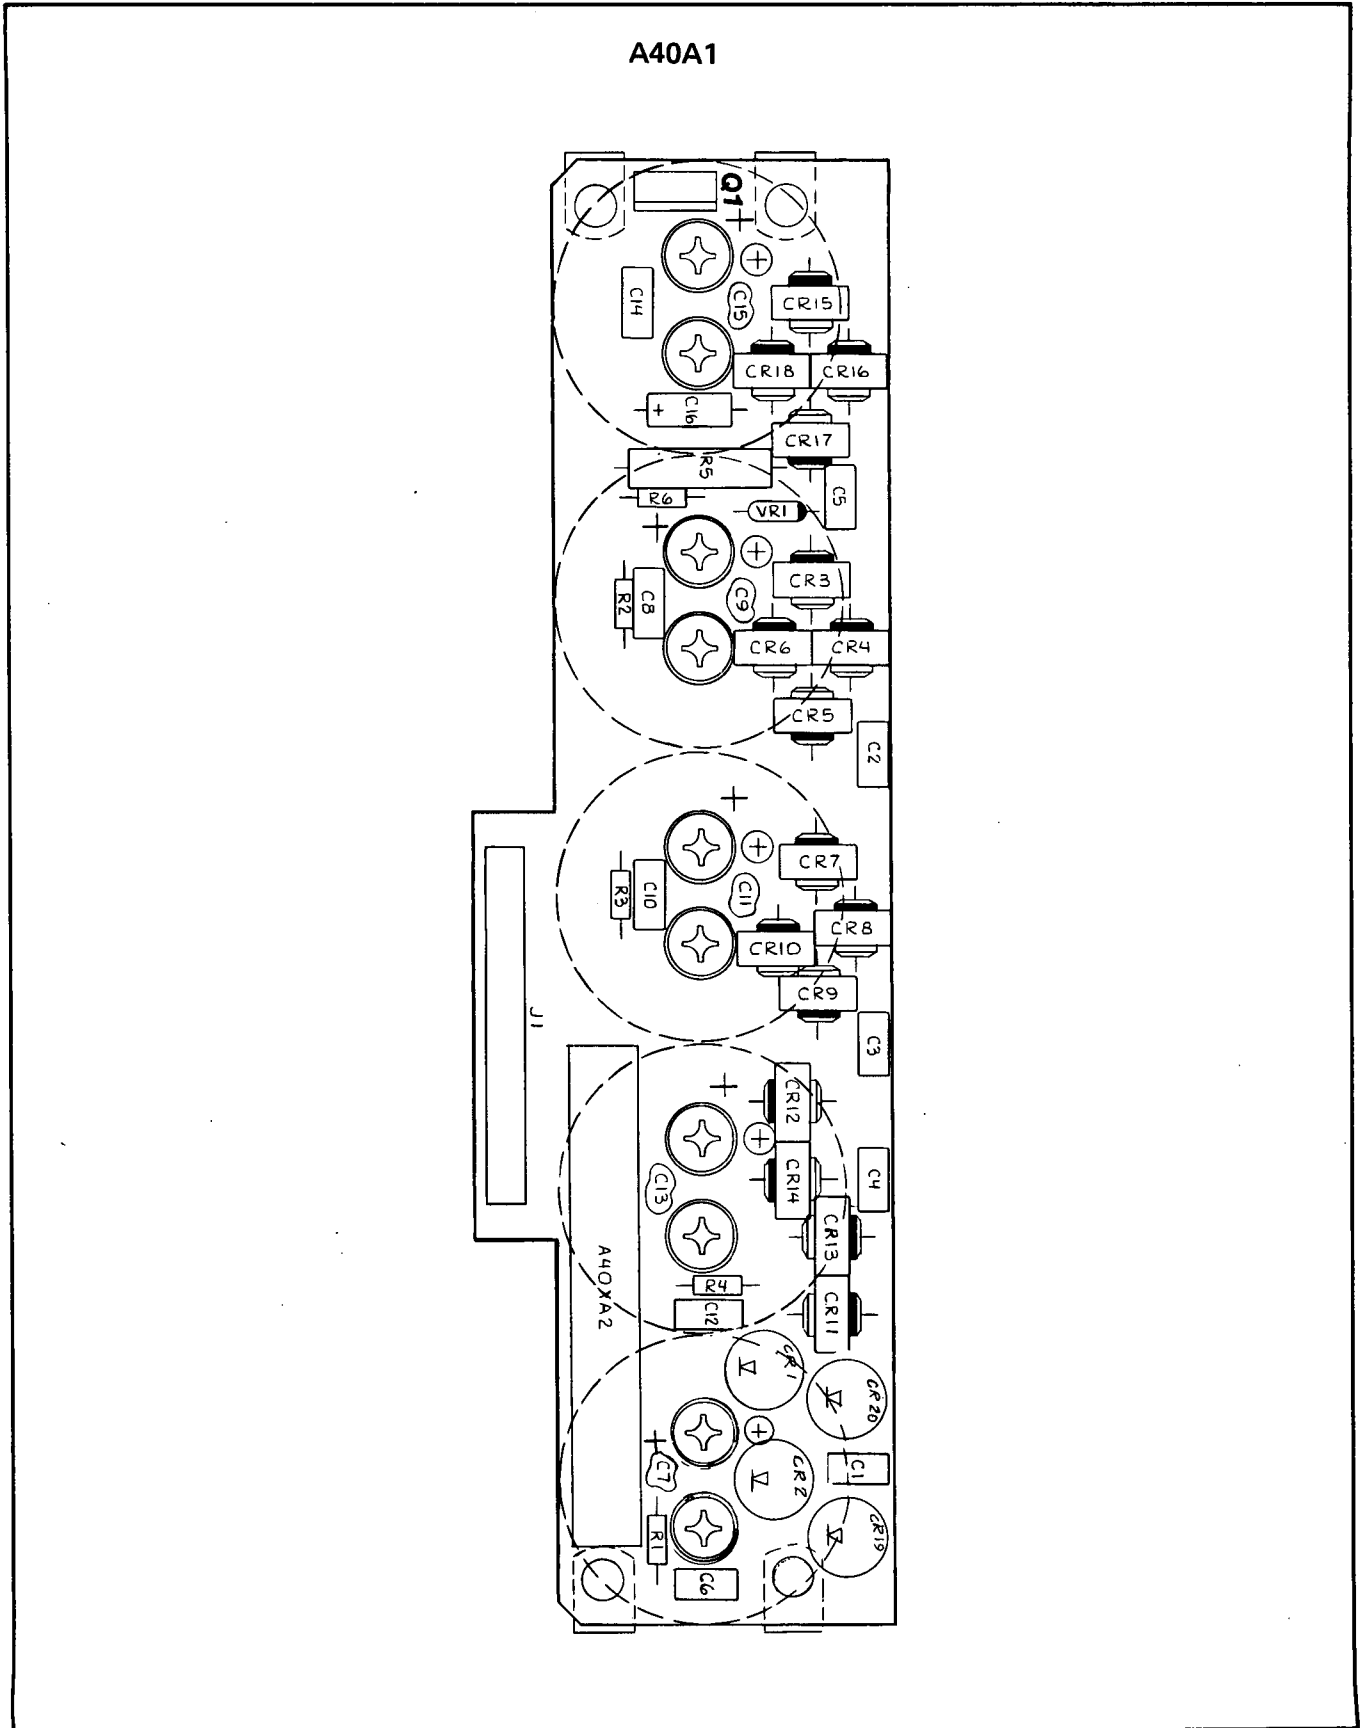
A40A1 Rectifier Assembly, Component Locations
